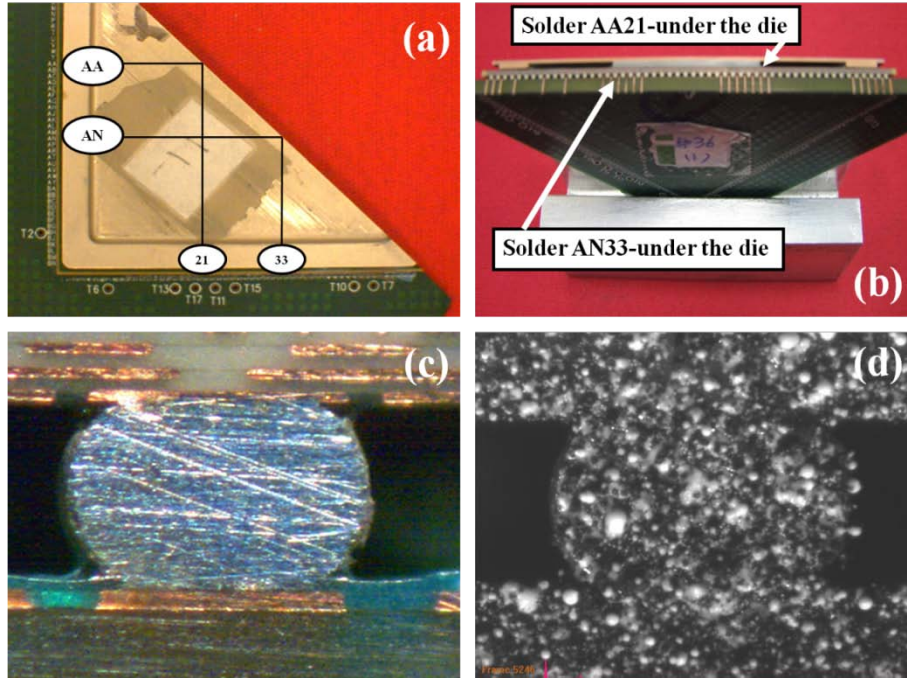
DSC measurement steps presented at a) the diagonal cut of the sample, b) the location of critical corner joint, c) area of the measurement of critical joint in higher magnification and d) the solder joint after being speckled.
